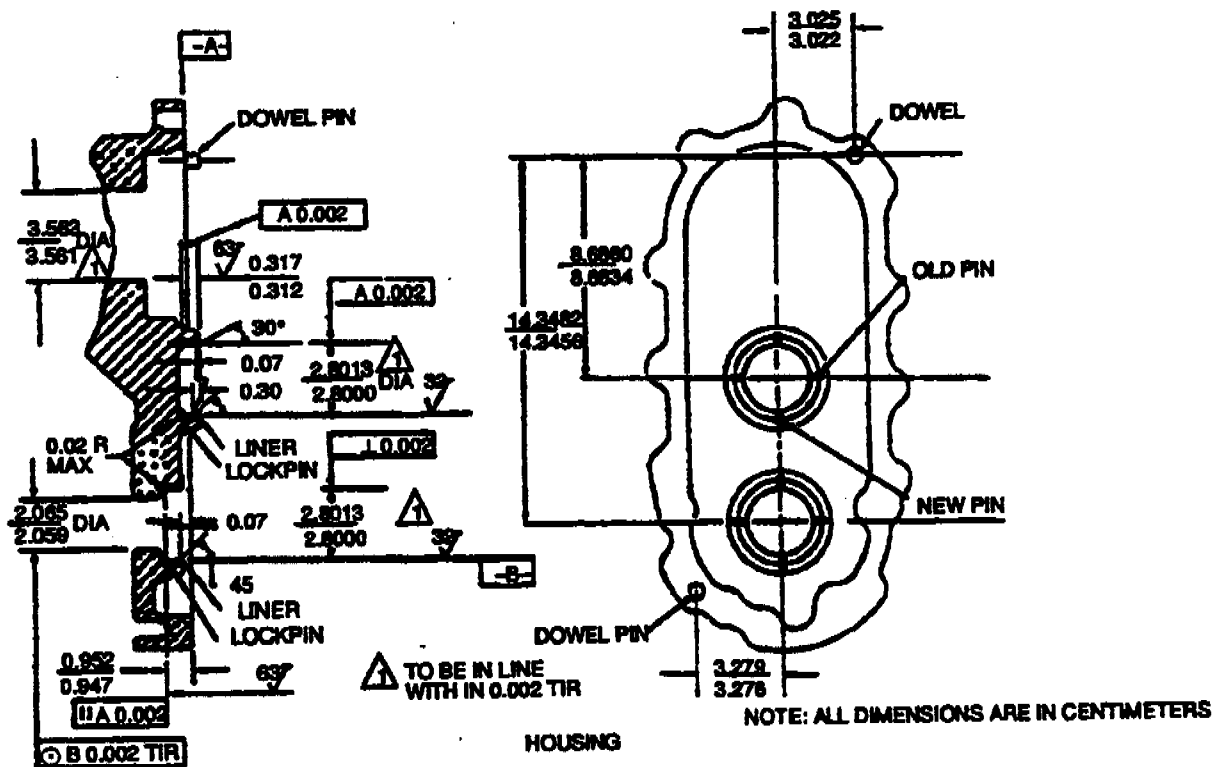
Overspeed Governor and Tachometer Drive Assembly Bearing Liner Repair (Metric). (Sheet 2 of 2).
